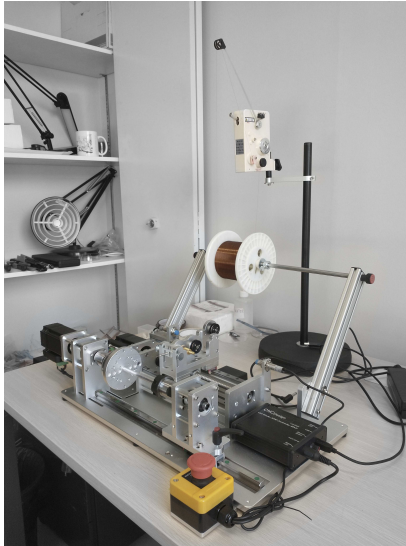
CNC design winding machine with the variable wire tensioner.
